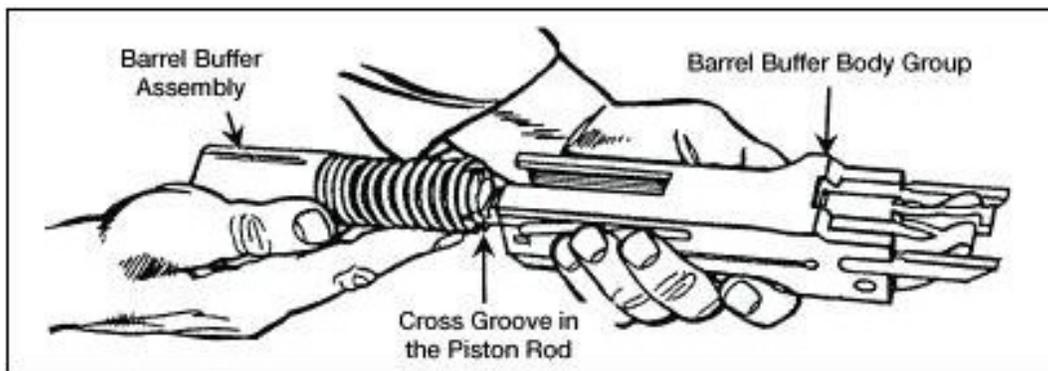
ST-1025_18 (Removal of the barrel buffer assembly)
